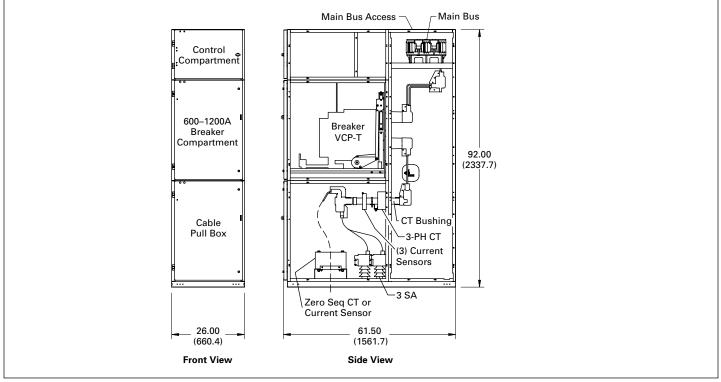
Typical 1-High Breaker Unit, Cables Out the Bottom
